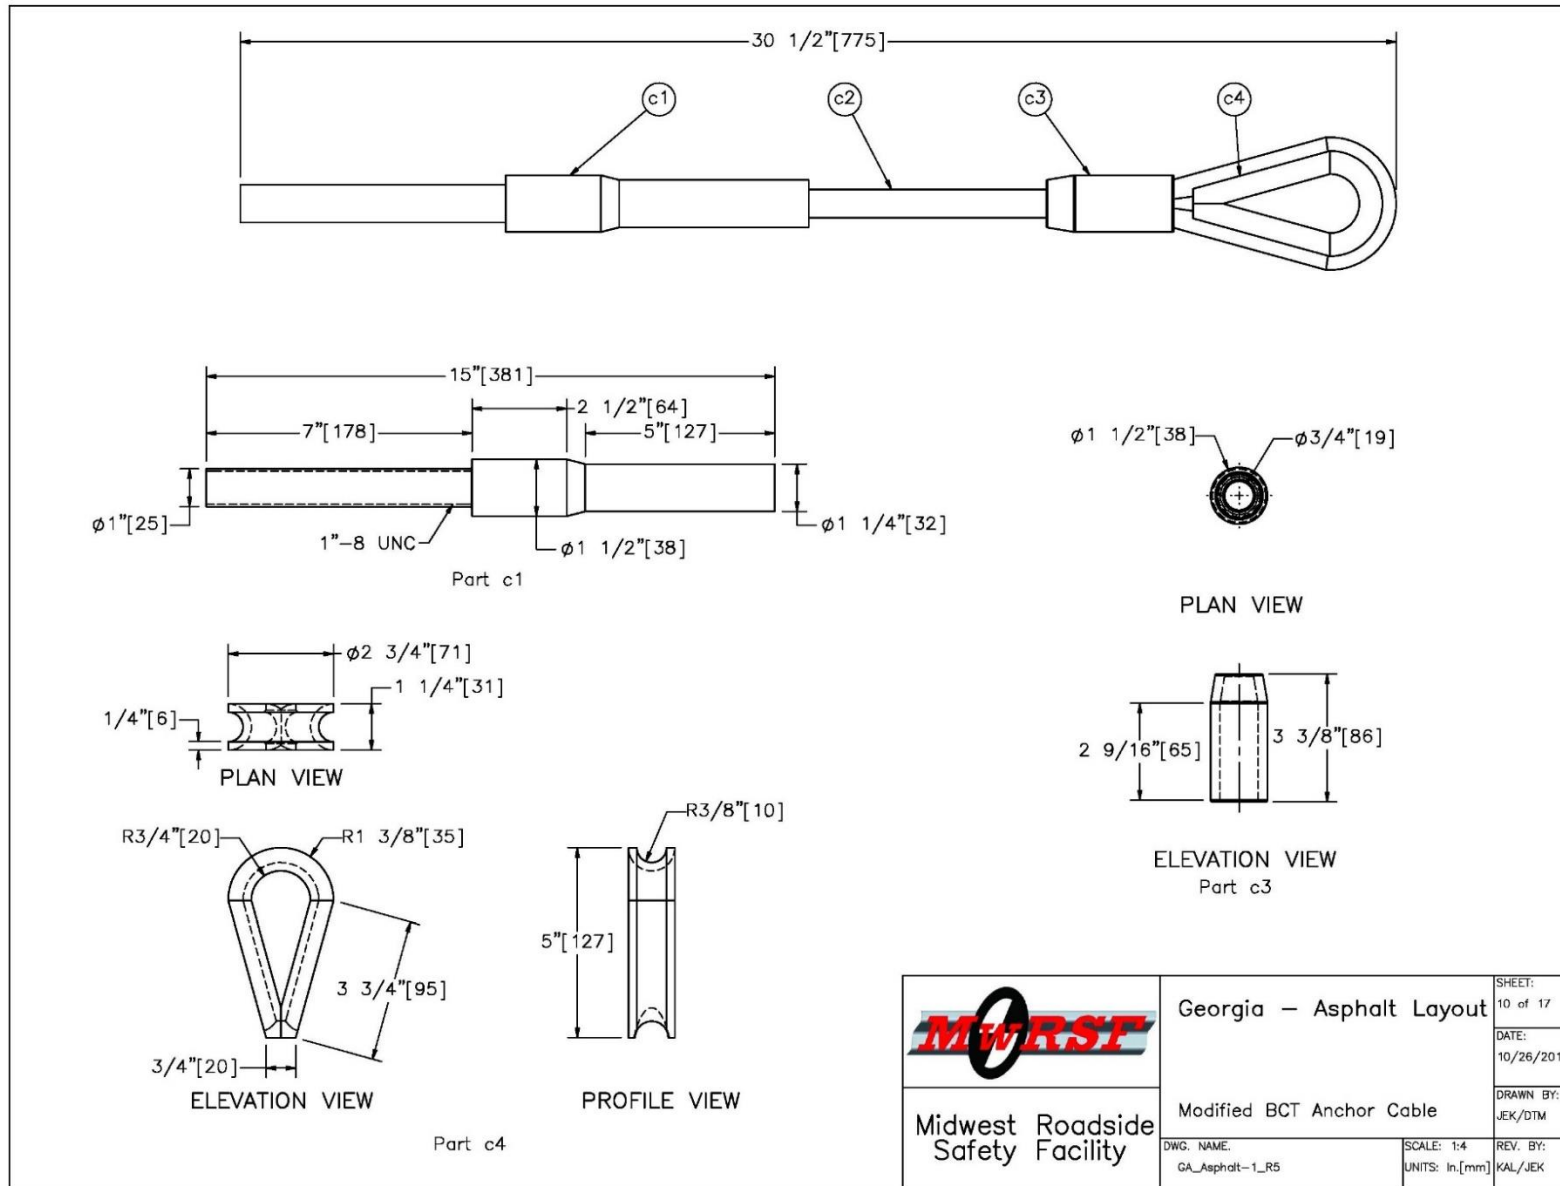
Modified BCT Anchor Cable Detail, Test No. GAA-1
